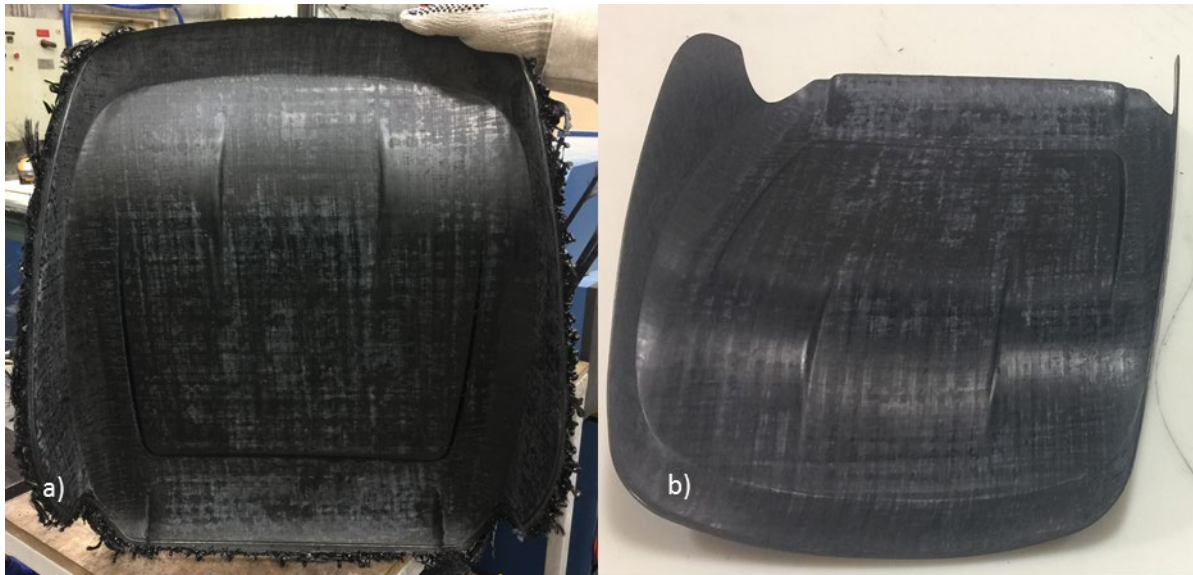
Eight-layer fabric preform after cutting to shape.
